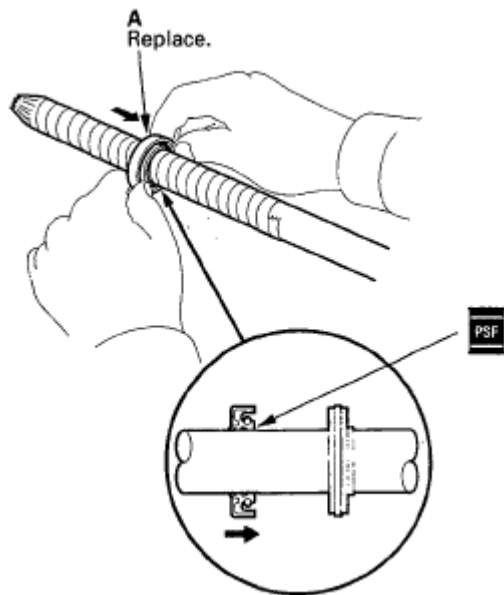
Identifying Coating Inside Surface Of Cylinder Seal With Power Steering Fluid
